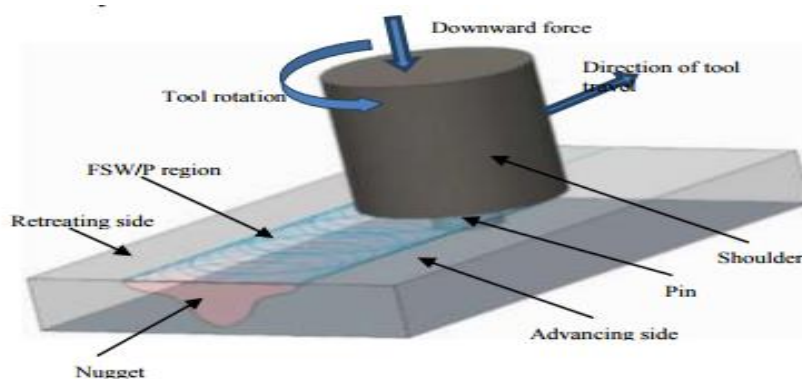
Schematic Drawing of friction stir welding [8]
